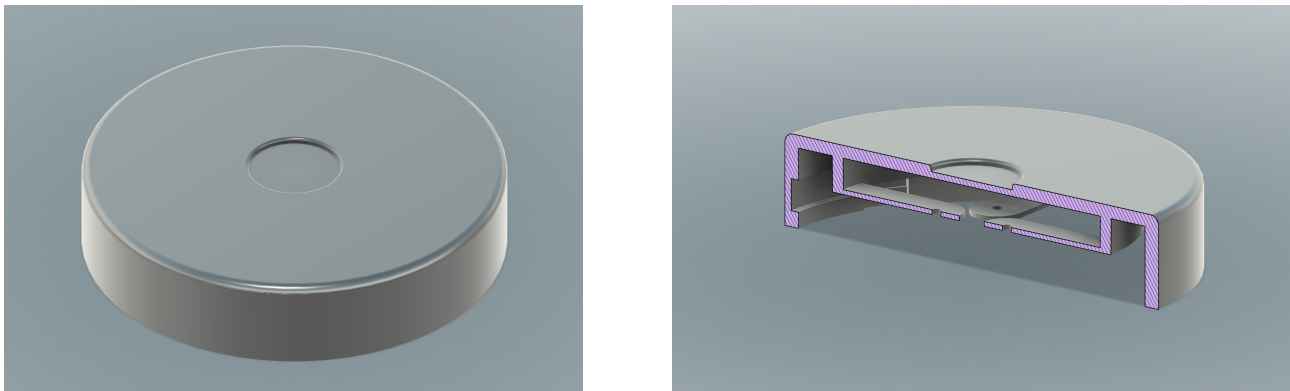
Service Cap. Forms the uppermost closure of the housing, interfacing with the electronics tube via a bayonet locking mechanism. A single NBR face O-ring provides the primary watertight barrier. The cross-section reveals the O-ring groove geometry and the recessed radome window [2] that accommodates an optional GNSS patch antenna [3] without penetrating the pressure boundary.
